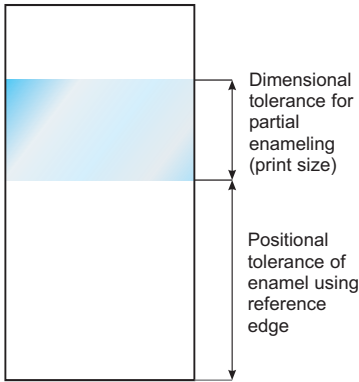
for Tab. 20: Type of defects / tolerances for full surface or partial surface enameled glass
